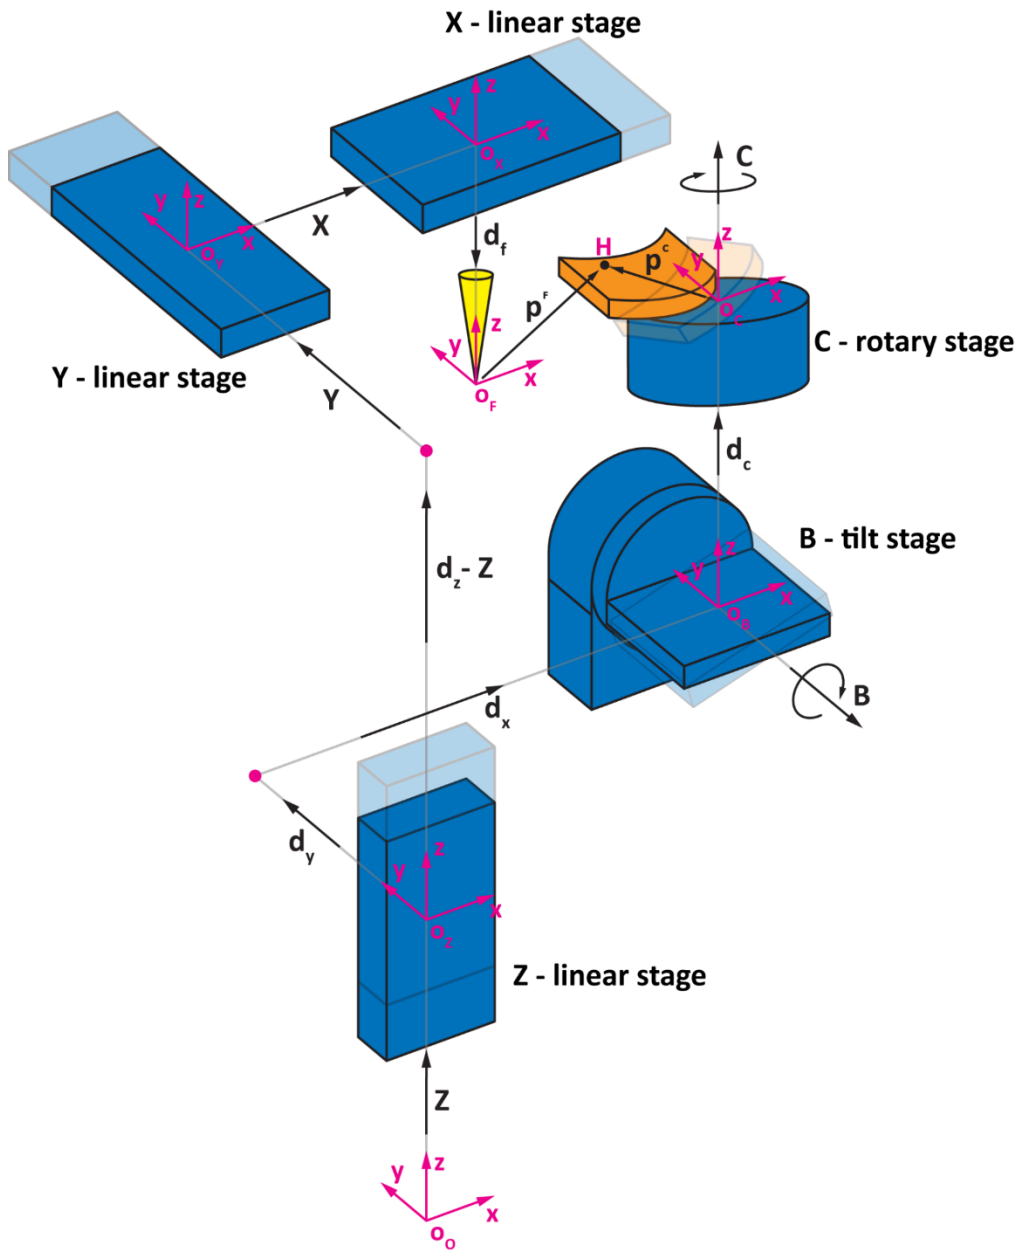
Kinematic diagram of 5-axis laser drilling machine
